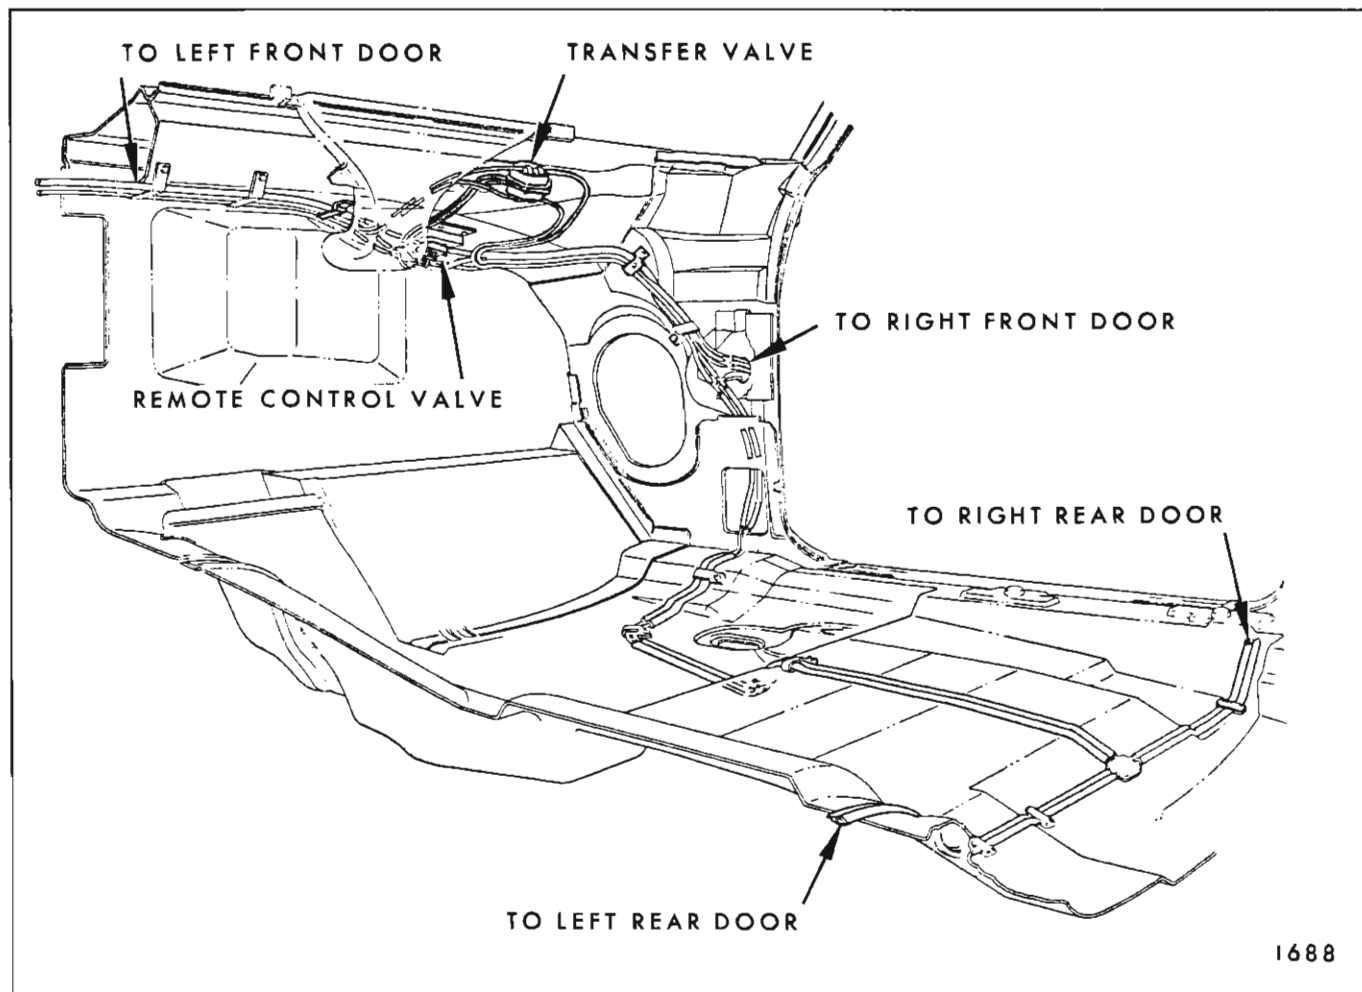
D48—Vacuum Door Lock Vacuum Hose Routing - Right Side of Body
